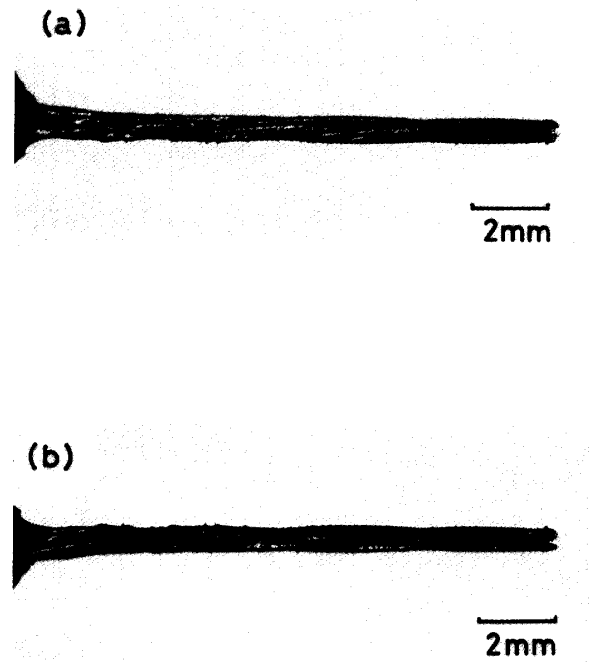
(a) Top view of a rubber adhered tire cord pulled out in tension.
